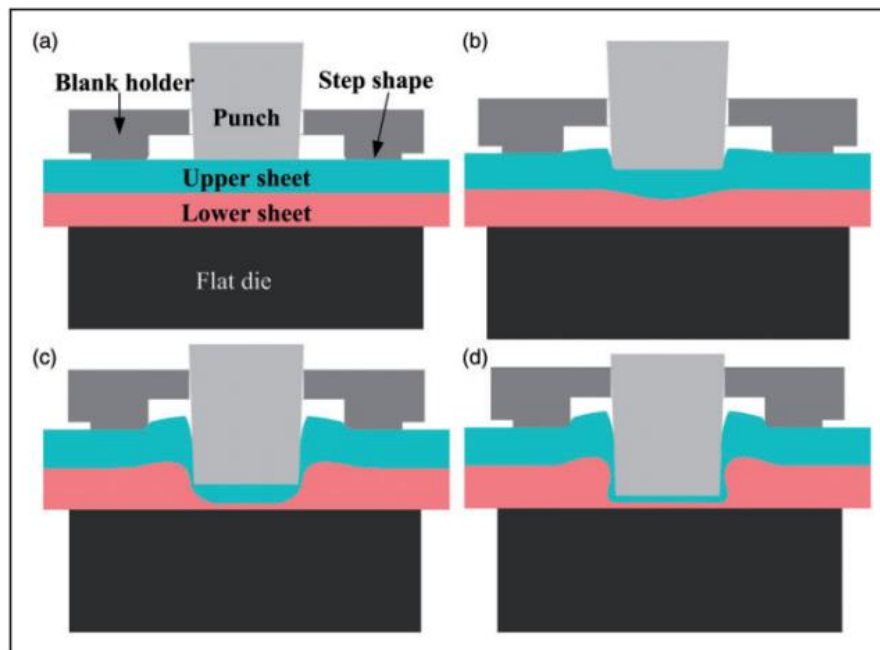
Flat clinching: (a) location; (b) drawing; (c) protrusion; (d) filling [45]
